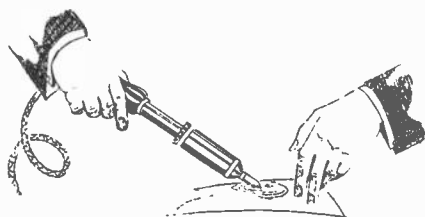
This illustrates the correct method in tinning a soldering iron.
